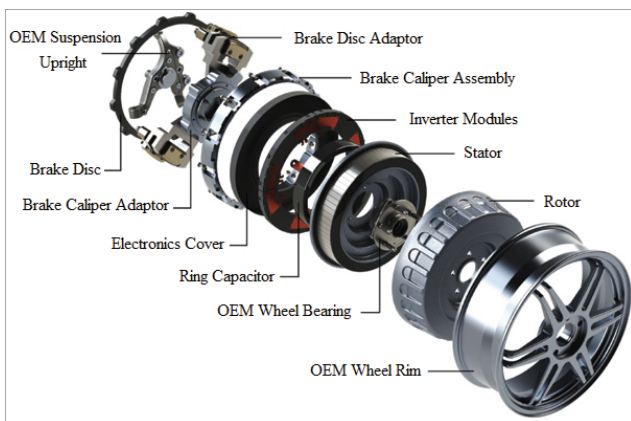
A commercial in-wheel electric motor by Protean Company.
